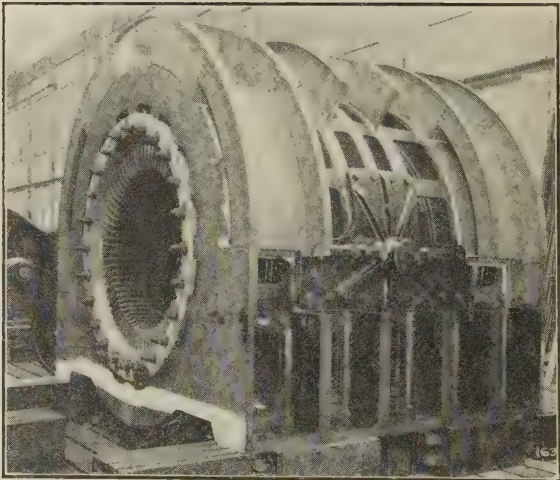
TURBO GENERATOR STATOR WITH VENTILATING OUTER SKELETON PARTLY ASSEMBLED
